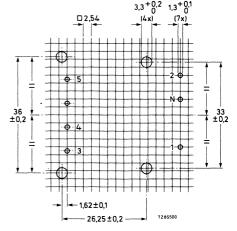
Hole pattern for mounting on a printedwiring board, viewed from solder side.
